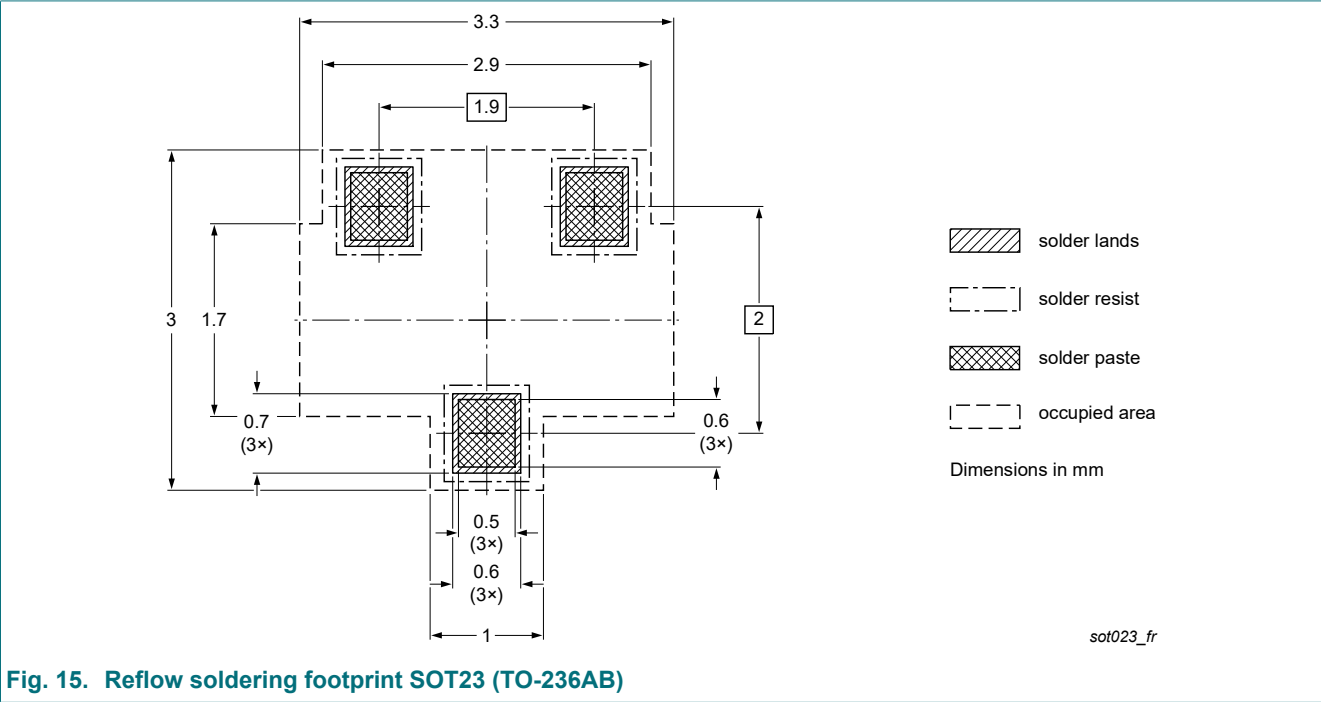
Reflow soldering footprint SOT23 (TO-236AB)
